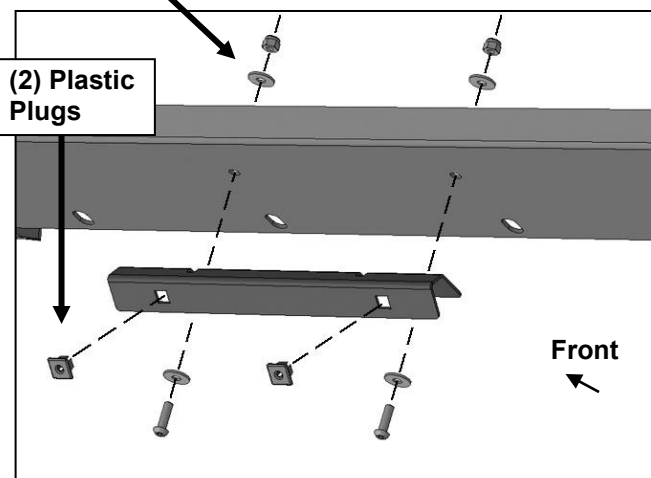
Remove rubber plugs to attach Top Light Bracket to Bumper
